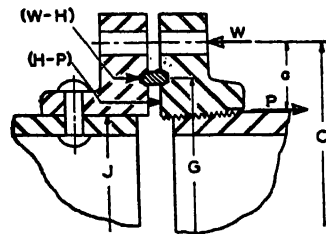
Riveted and Screwed Ring-joint Flanged Fittings.
